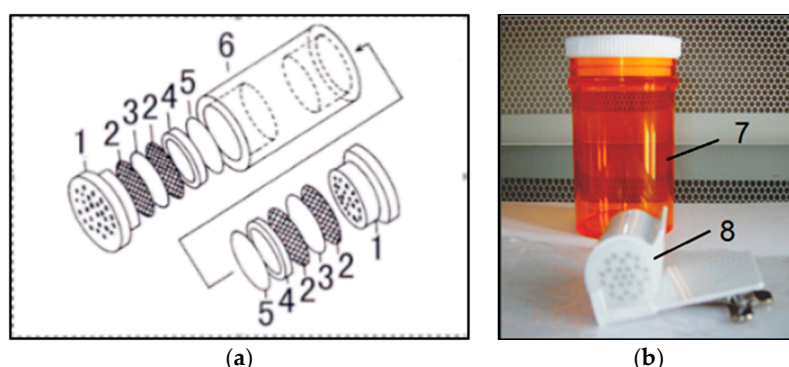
Ogawa passive sampler components: 1—Inlet; 2—Stainless Steel Screens; 3—Collection Pad; 4—Ring; 5—Backing Tab; 6—Body; (a) [22]. 7—Plastic Sample Container; 8—Assembled Sampler (b).
